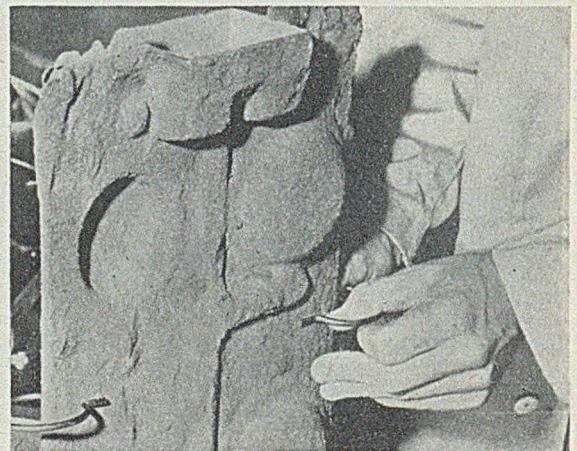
Two Half-moulds are Assembled Face to Face and held together by Metal Clamps.
